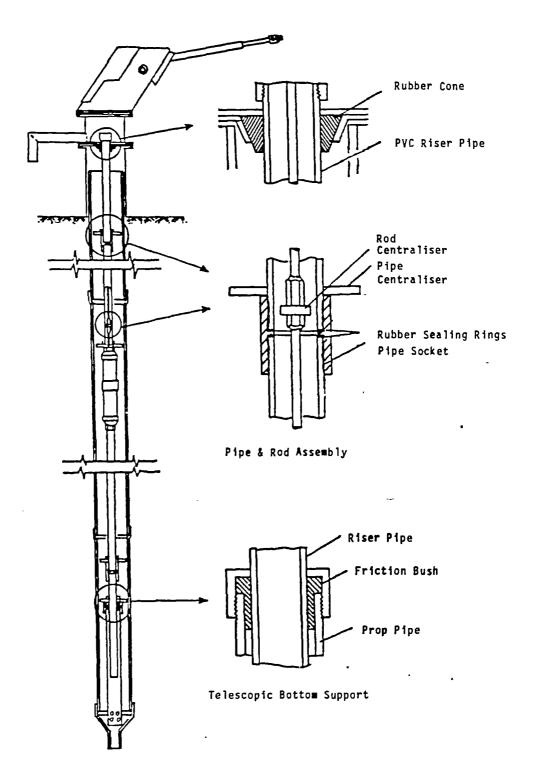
India Mark II hand pump with bottom supported PVC riser pipes
